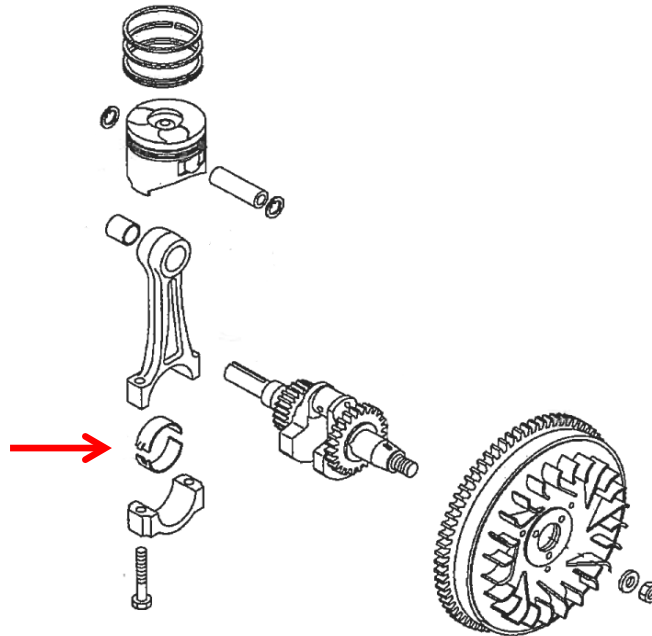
Diagram of connecting rod assembly with the bearing shells indicated (68, 70)
